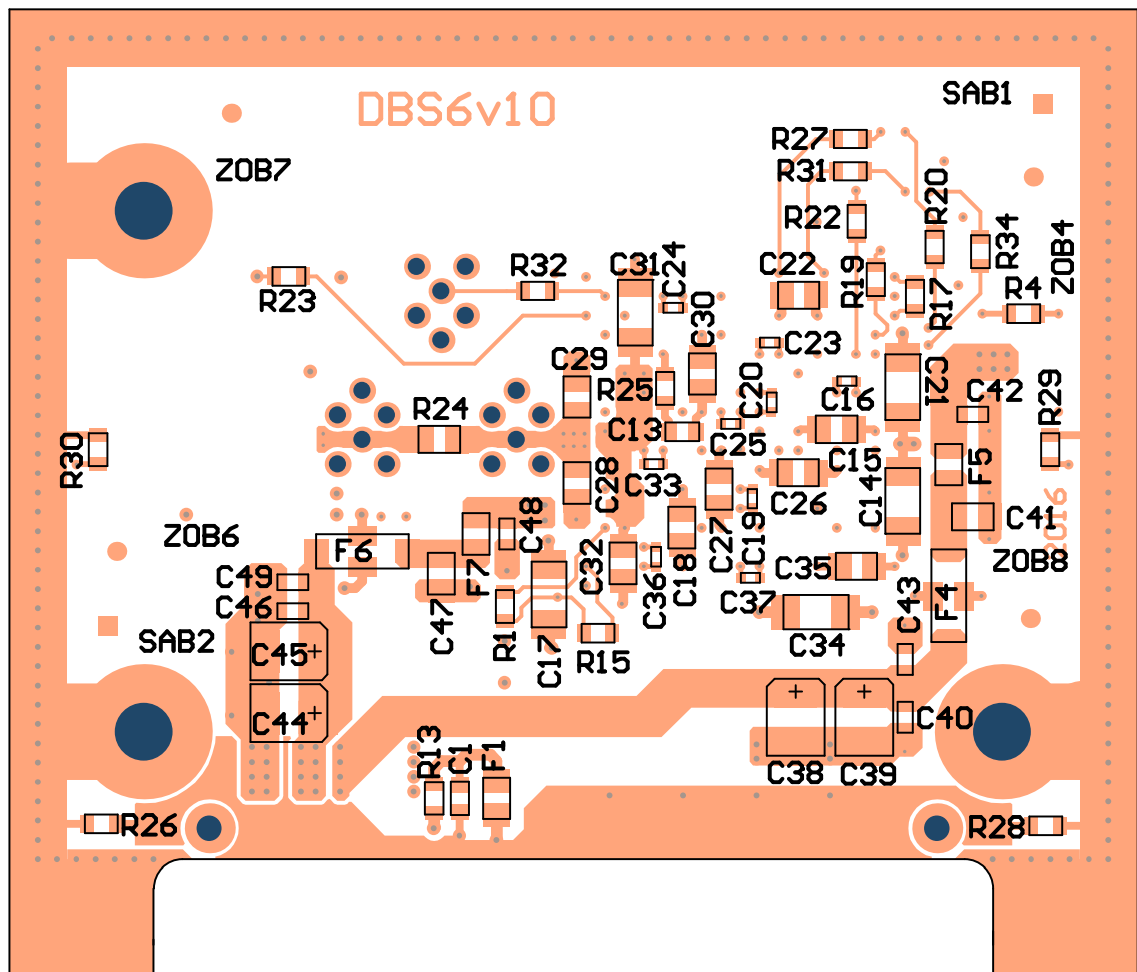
37 Daughter board S6 composite drawing - Bottom layer
